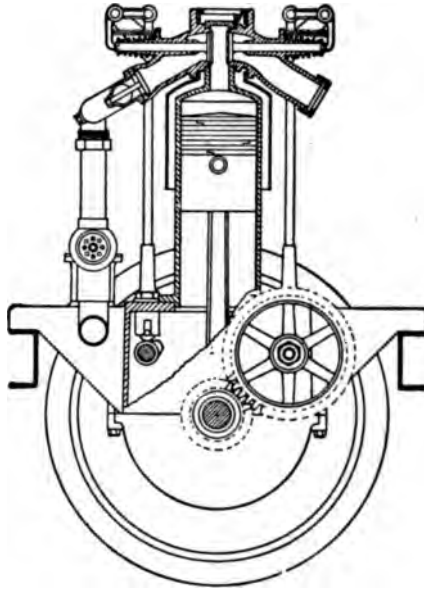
CROSS-SECTION OF THE FRAYER-MILLER MOTOR.
